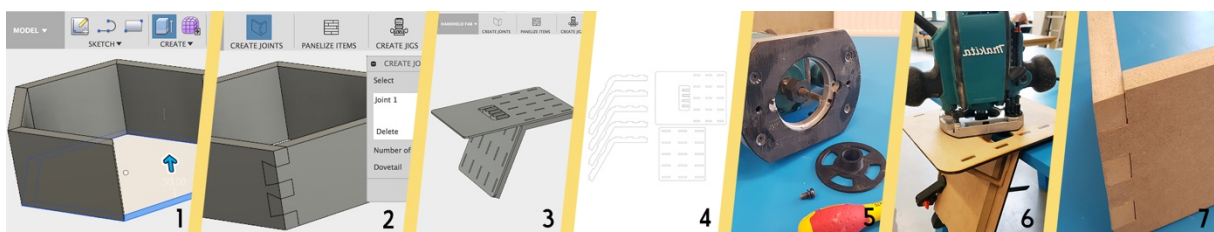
Example process: 1. designing the object, 2. generating the joint, 3. generated jig, 4. plans for laser cutter 5. installing router copy ring 6. milling the part 7. finished part
